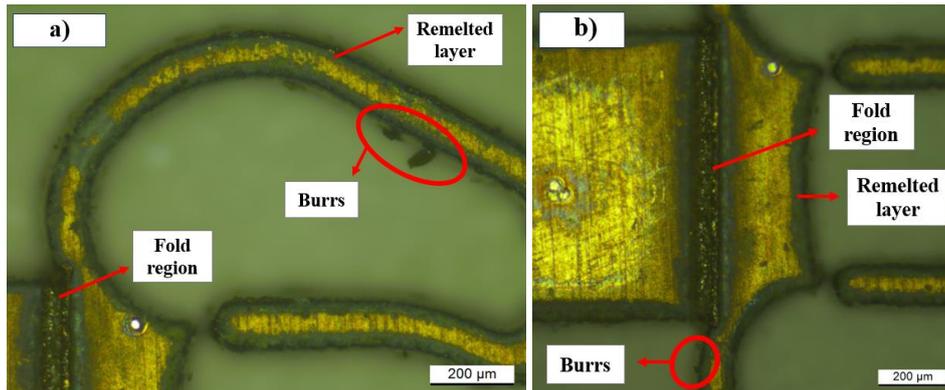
a) 100 x magnification on top region of the extremity of the clamp and b) fold region both obtained via optical microscope.
